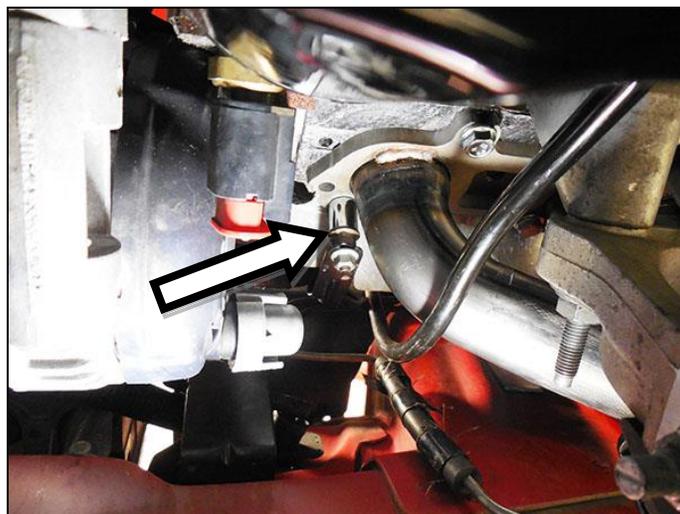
Dipstick tube mounting bracket spacer w/ OEM bolt
